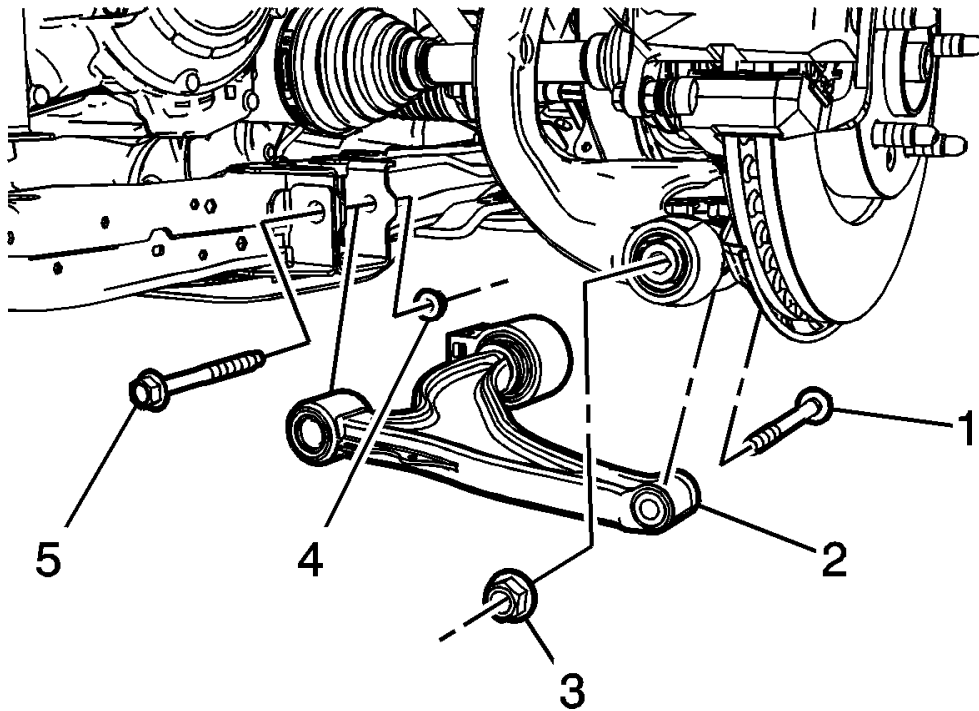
Front Lower Control Arm, Nuts And Bolts
